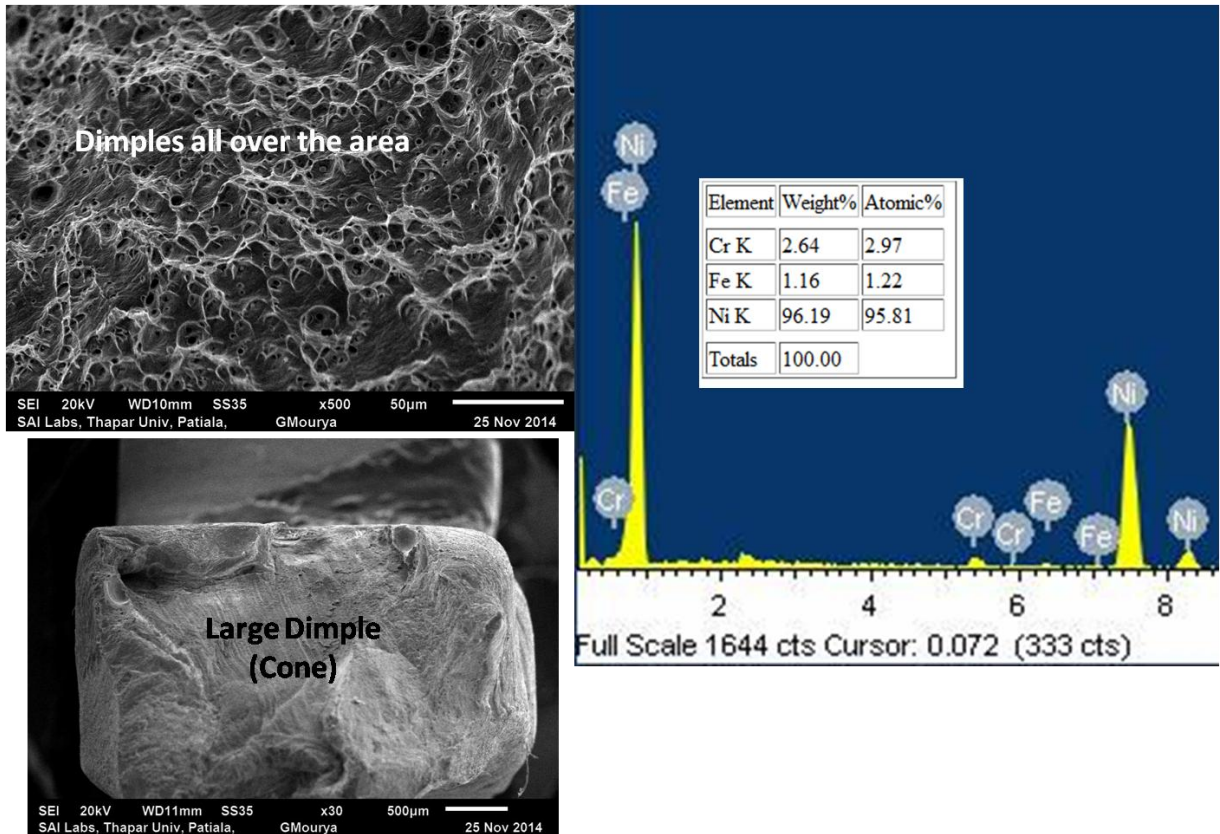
Fractured area of TIG welded hastelloy steel with EDS analysis
